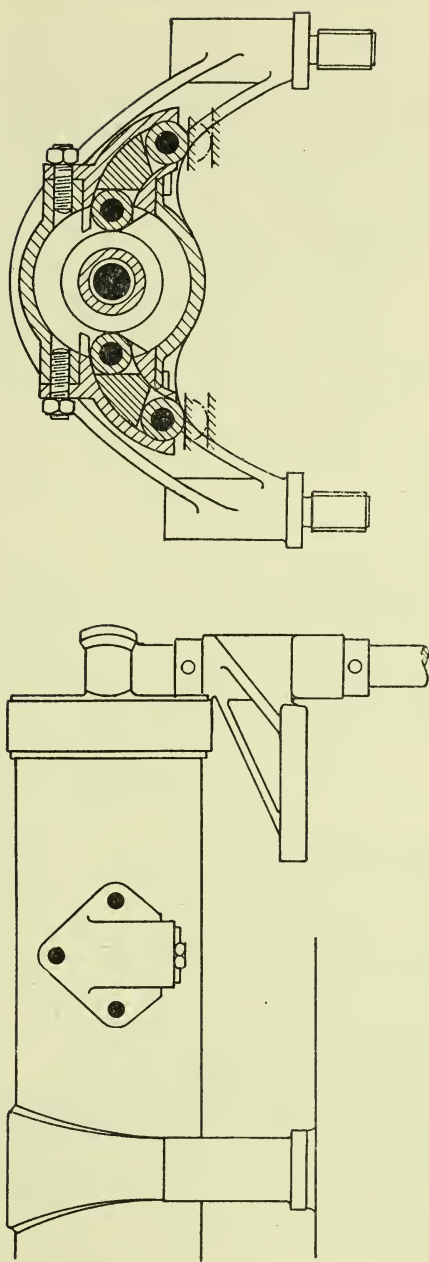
THE BUGATTI OVERHEAD VALVE GEAR WHICH IS CHARACTERIZED BY CURVED QUADRANT-SHAPED PUSH-RODS WITH ROLLERS AT BOTH ENDS
